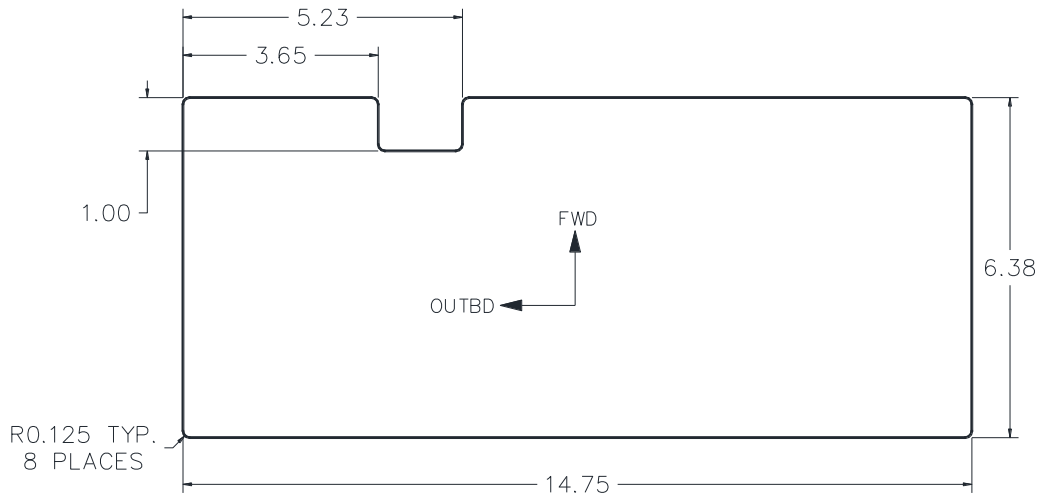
Floor Skin Patch – Extended Seat Rails (dimensions in inches)
